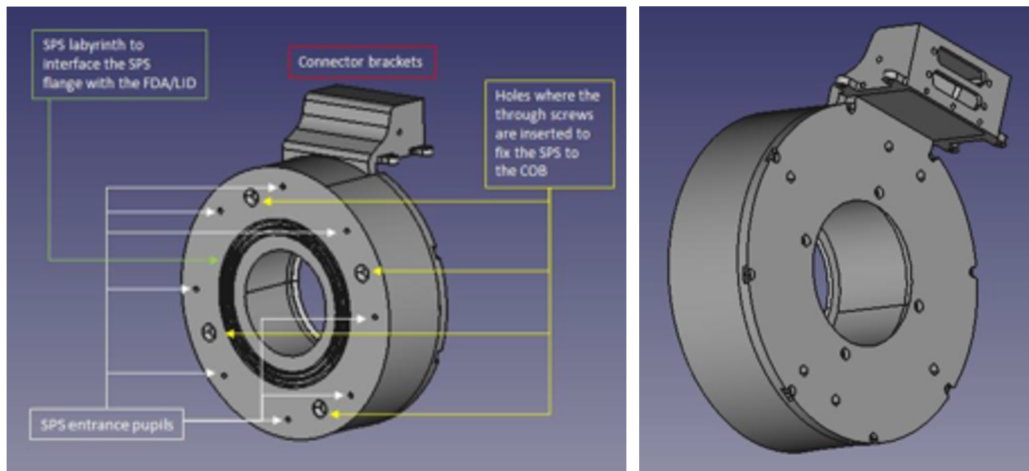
CAD views of the SPS flange. Left: front view with the indication of SPS holes positions. Right: the back part before mounting on the optics tube.
